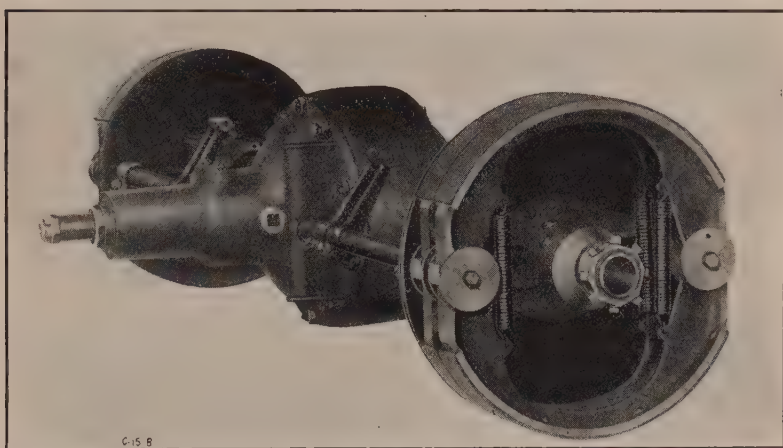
Chandler pressed-steel rear-axle construction and double expanding brakes.
